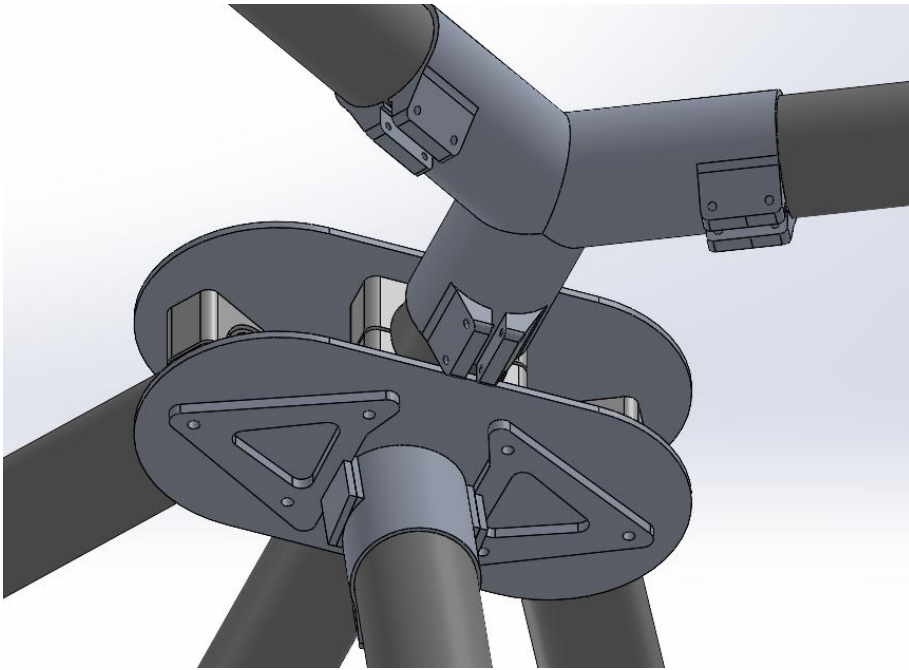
Landing gear attachment, Y-shaped connector and outer plates for arm attachment
